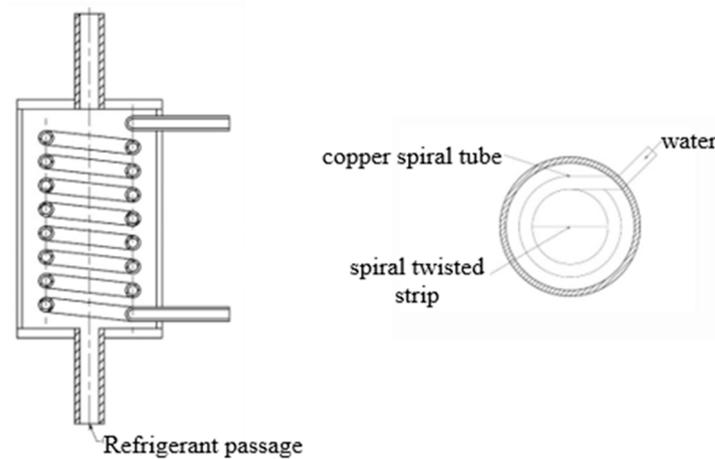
Illustrative representation of the miniature spiral-tube type evaporator.
